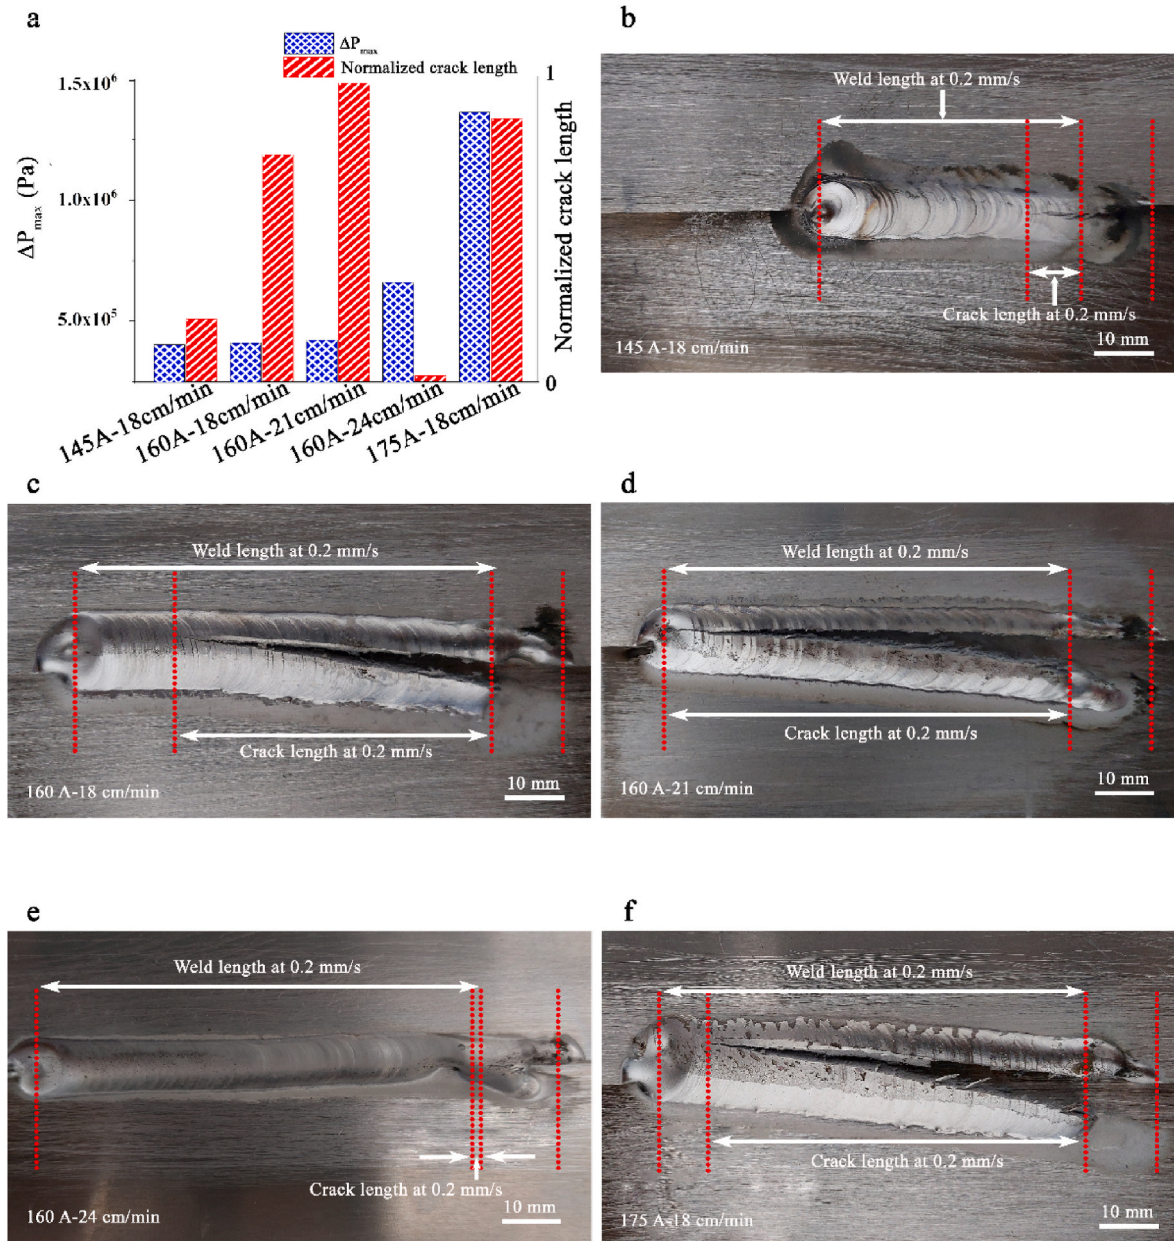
a) ΔP_{max} (directly related to the solidification cracking susceptibility) for various welds obtained from RDG model, b-f) Weldability test results indicating the weld and crack lengths at various welding parameters.
